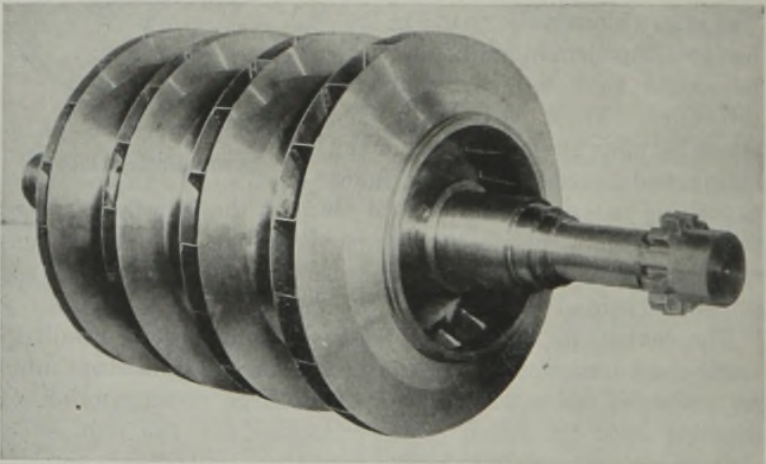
75,000 cfm 30 lb pressure turbine-driven blast furnace blower rotor; inlet end view.
